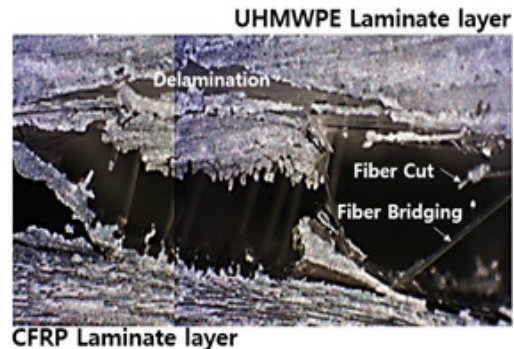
The fracture surface of the interface during the crack extension
